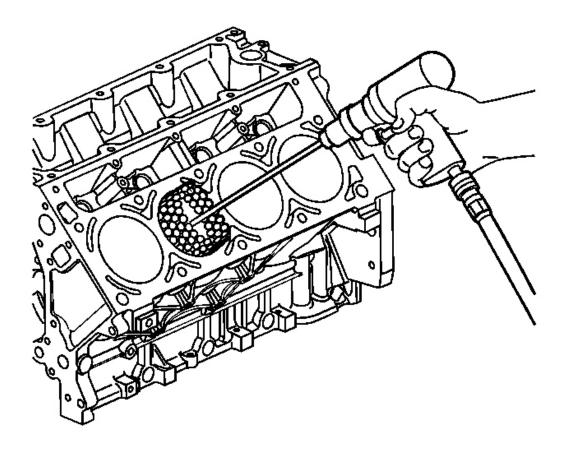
Deglazing Cylinder Bore Courtesy of GENERAL MOTORS CORP.
